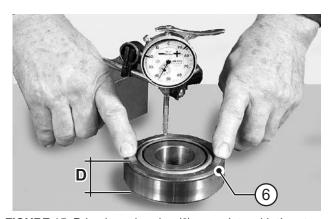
Bring inner bearing (6), complete with thrust block, under gauge "DG".
